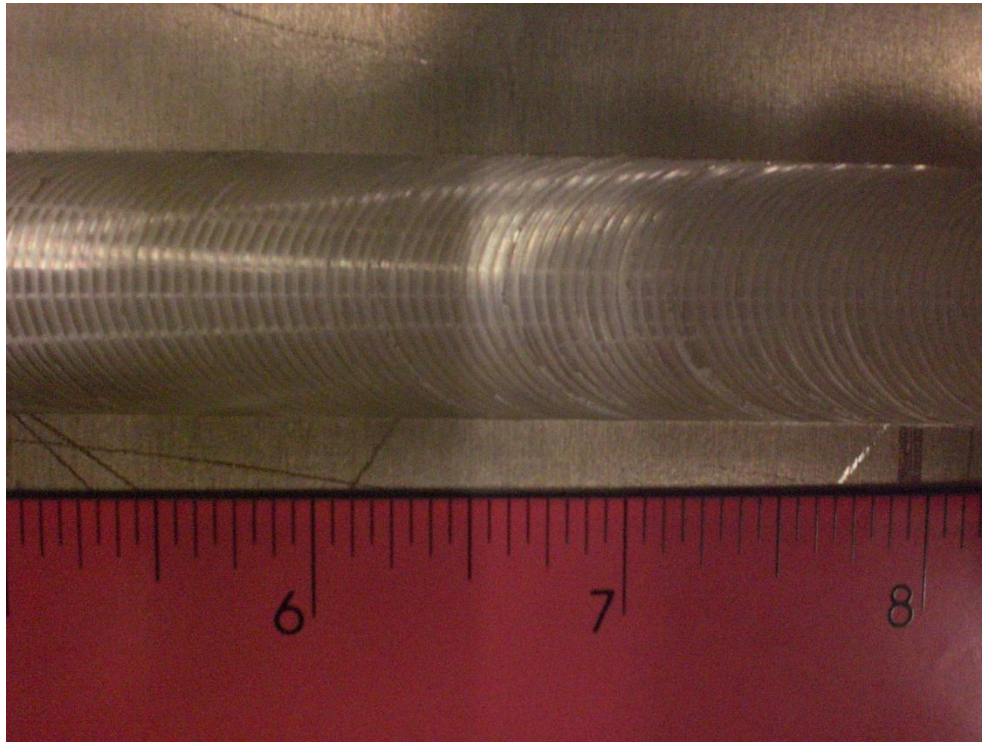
Narrow weld beads (rated 1). Welds measuring less than the tool shoulder width were considered narrow.
